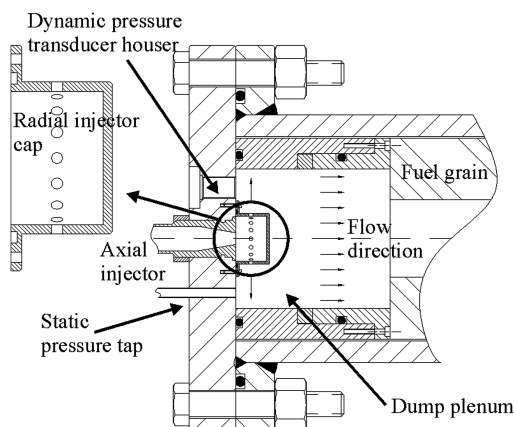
Axial injector/radial injector and dump plenum at the head end of the motor.
